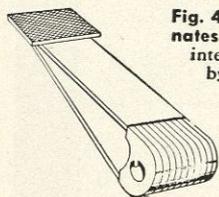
Saves 73%, Eliminates Broaching. Hub with integral key is produced by stacking stampings in assembly. Arm is 10 gauge, brake formed and welded to hub. Cost is only 31¢. Weighs 2.2 pounds.
